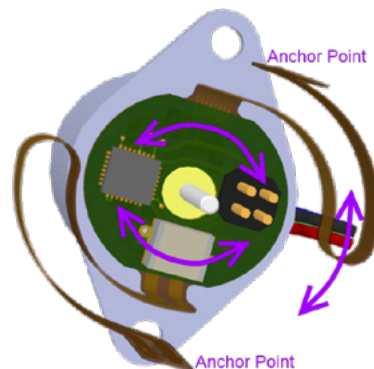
The fully folded view of the assembly, including the 3D body of the stepper motor
